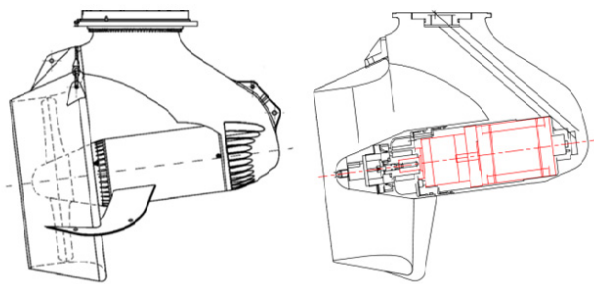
Assembling drawings of full and model scale azimuth thrusters of motor inside type (full-left, model-right)
